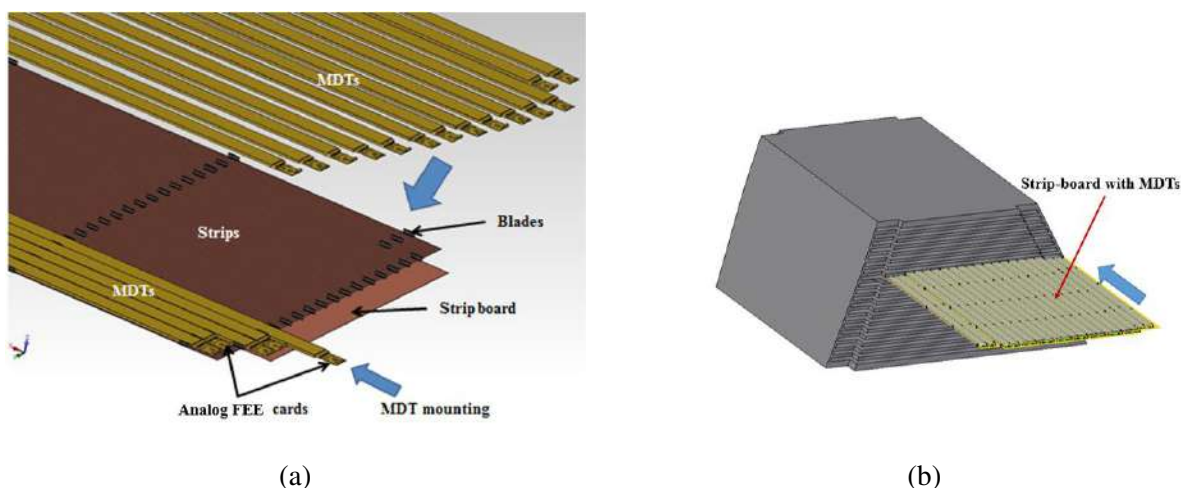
(a) Mounting of MDT detectors on the strip board, forming the detecting plane. (b) Assembly of barrel module with detecting layers (MDTs with strip board and corresponding electronics).
